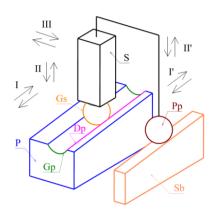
Solid electrode erosion machining scheme corresponding to the Co&m case¹
